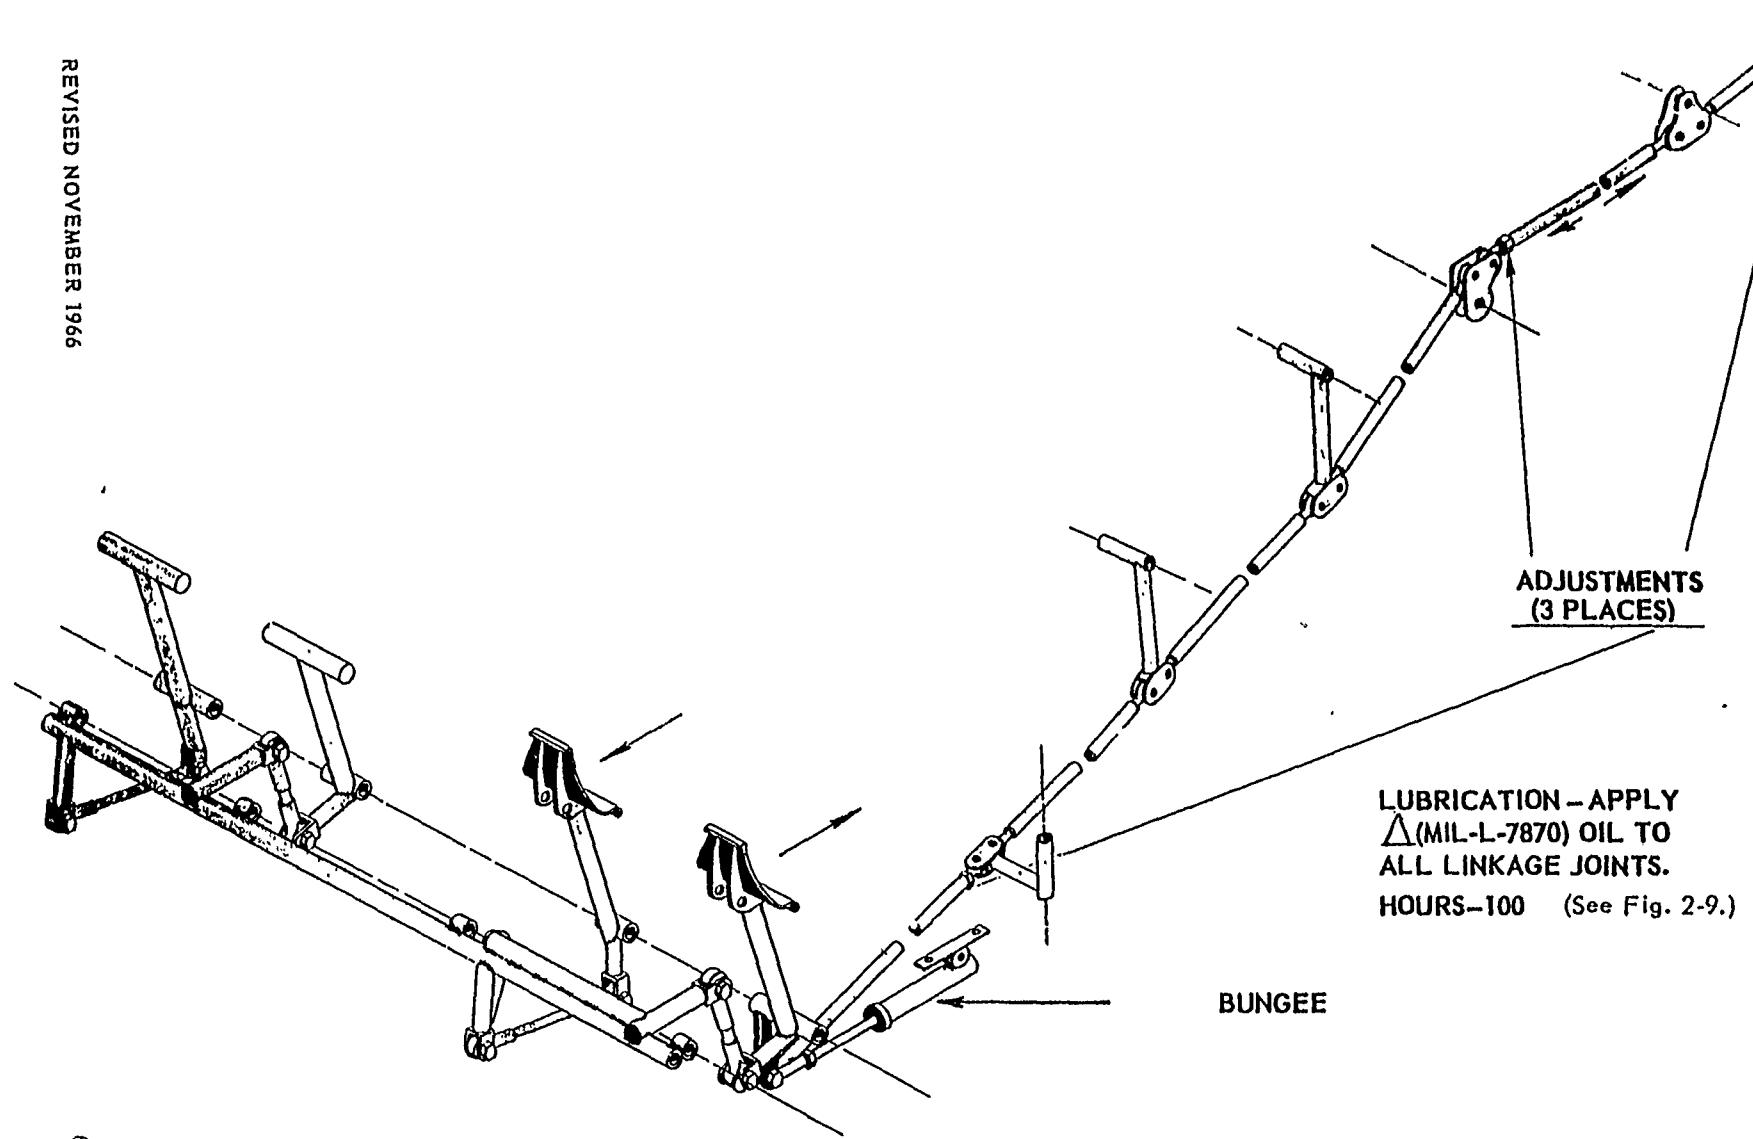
ELEVATOR CONTROL SYSTEM INSTALLATION
